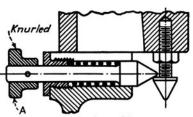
An adjustable gear-case cover lock. If the door is pushed shut, it is automatically latched, whereas pulling out the knurled knob A disengages the latch.
